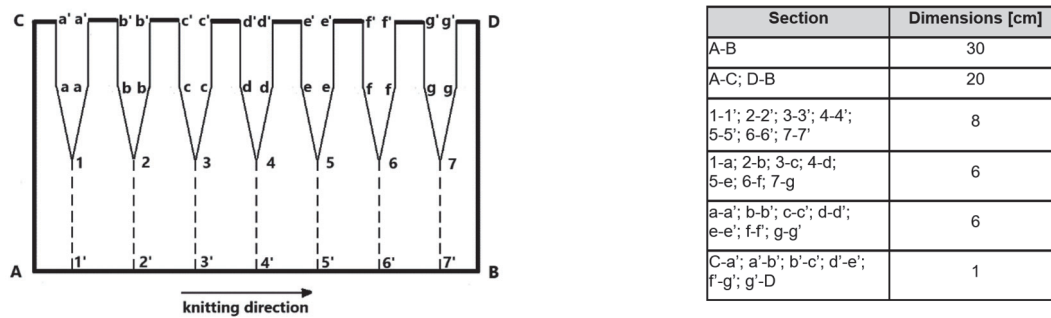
2D flat shape of the tube and the requested dimensions [16]
